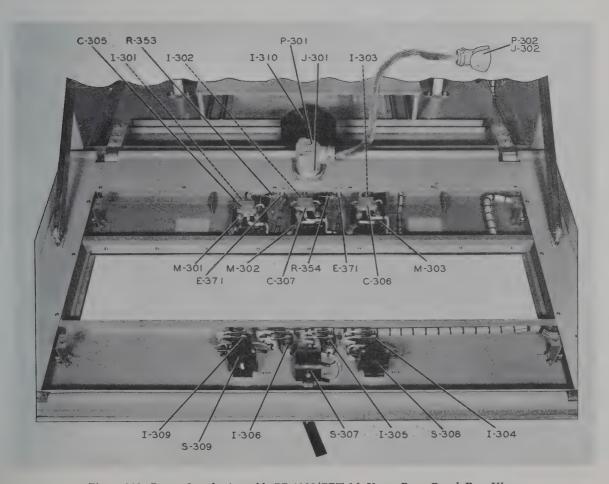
Power Supply Assembly PP-1088/FRT-26, Upper Front Panel, Rear View.
